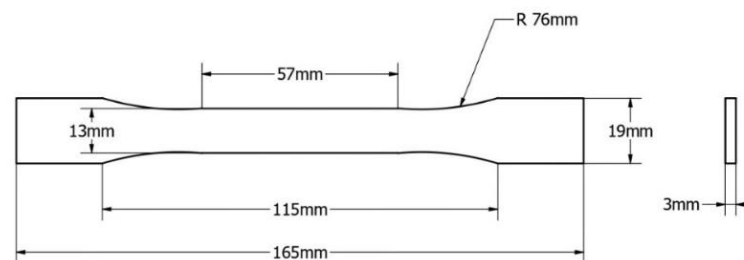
ASTM D-638-14 Type 1 Standard Tensile Test Sample [22].
